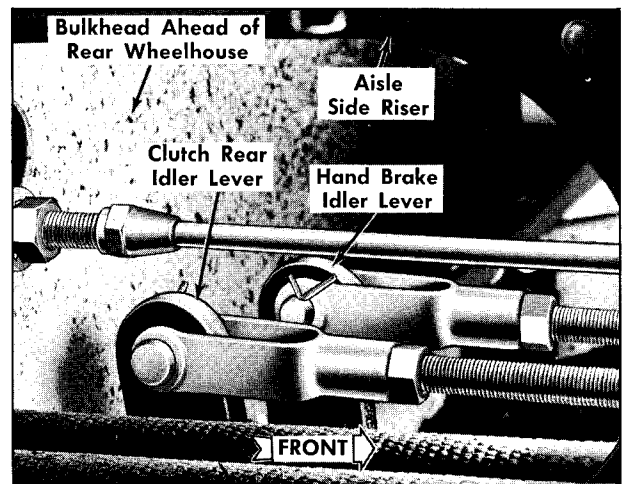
Clutch Control Rear Idler Lever as Seen Through Access Opening in Aisle Side Riser
